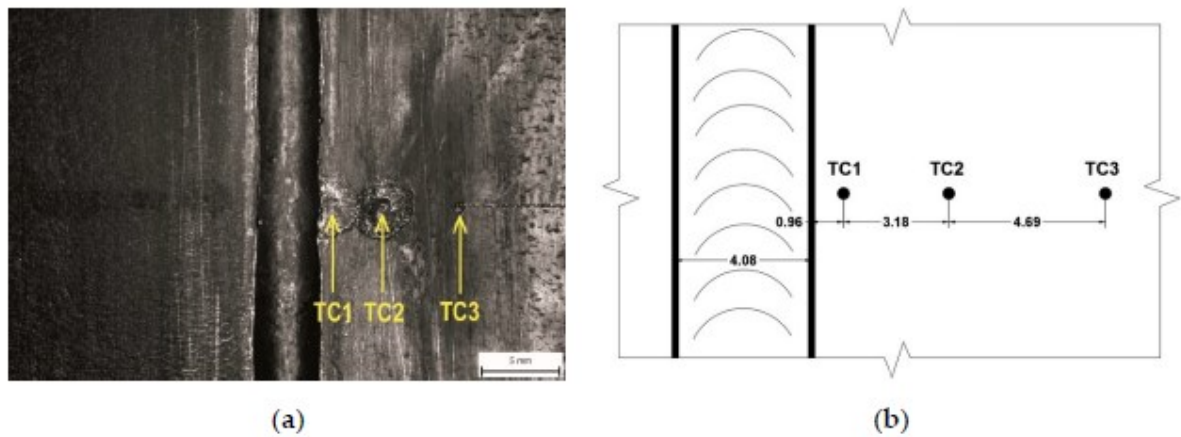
Placement of thermocouples on the bottom of the plate: (a) thermocouple placement on the root side; (b) geometry of the position of thermocouple.
